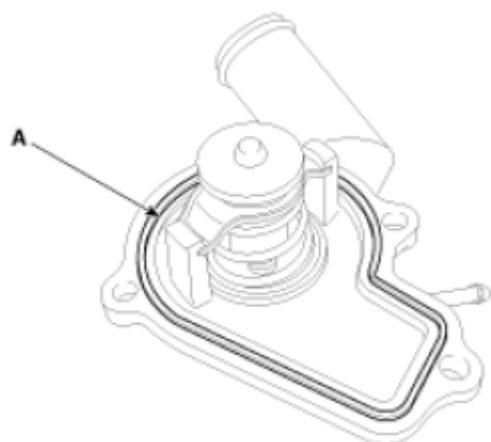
Identifying O-Ring Of Water Temperature Control Assembly
